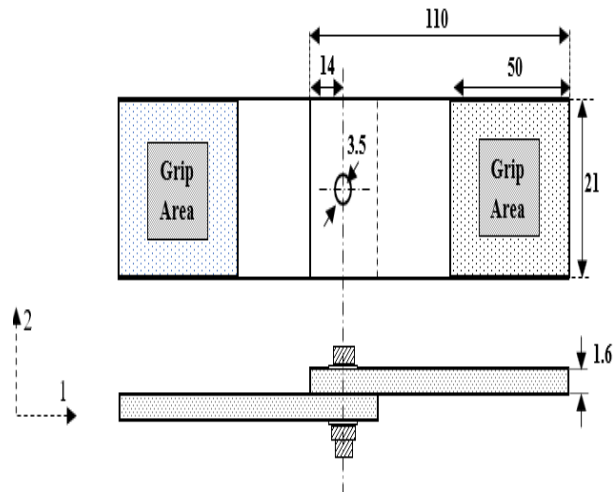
An illustration of single-lap composite bolted joint (all dimensions in mm)
